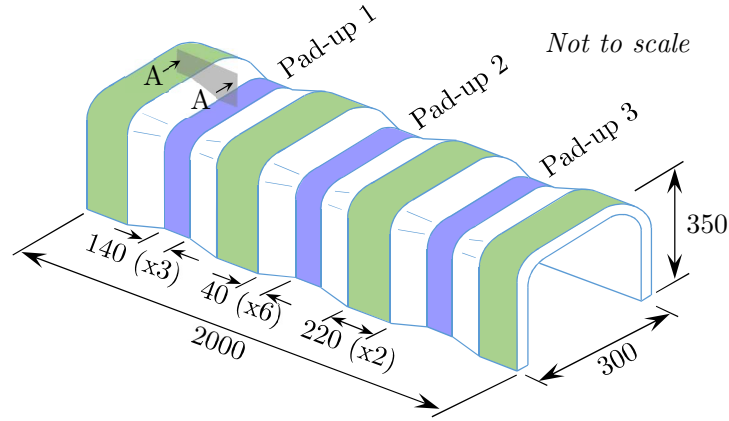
Isometric view of lay-up tool. A-A highlights one of the 1:10 ramps associated with the pad-ups. All 3 pad-ups have identical geometry; however, the inner 2 thin sections are shorter than the outer 2. Dimensions in mm.
